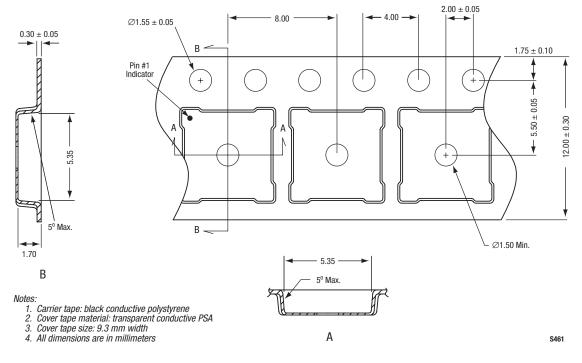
SKY73009 32-Pin RFLGA Tape and Reel Dimensions
